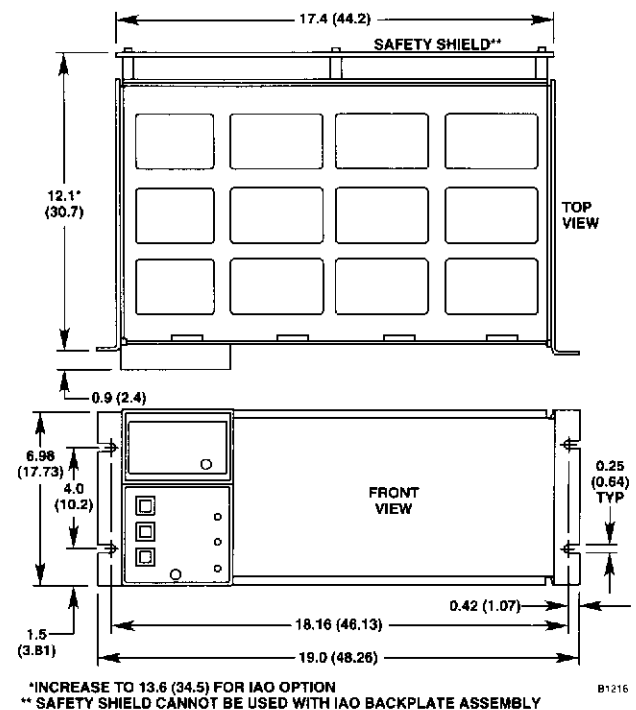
Four Unit 19 Inch Mounting Rack Dimensions in Inches (Centimeters)
